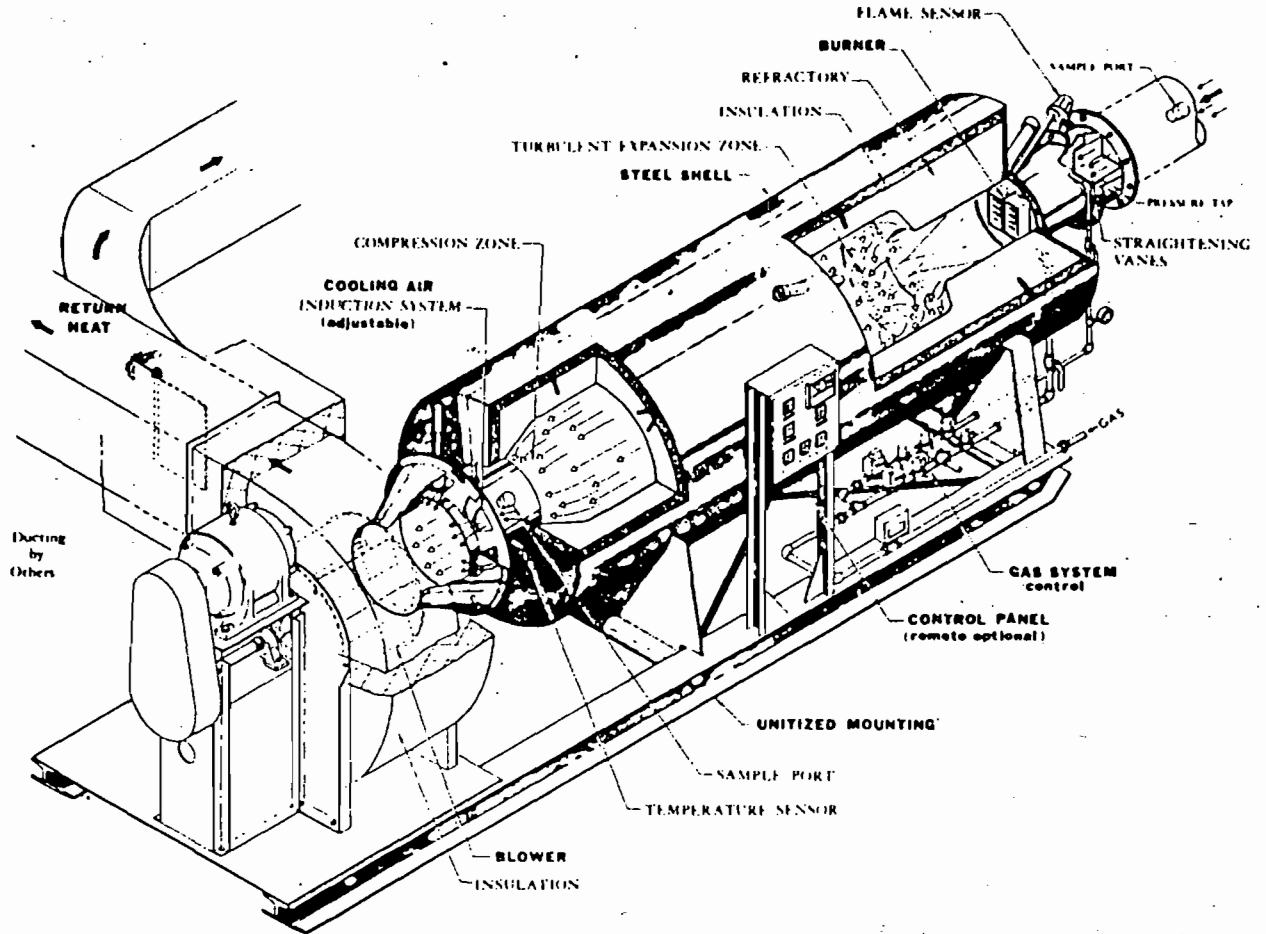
Sectional view of direct-flame afterburner (Gas Processors, Inc., Brea, Calif.).
